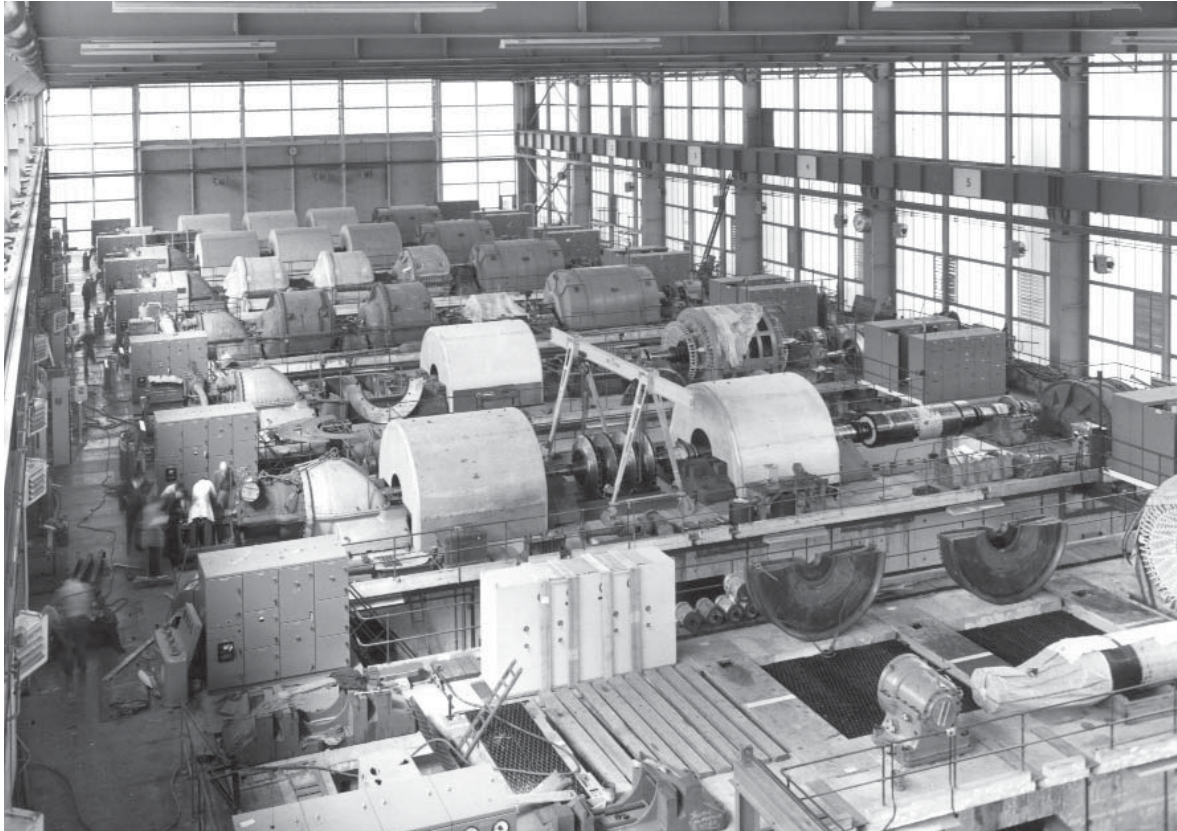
Compressors being installed in the Air House (NGTE 19699)
